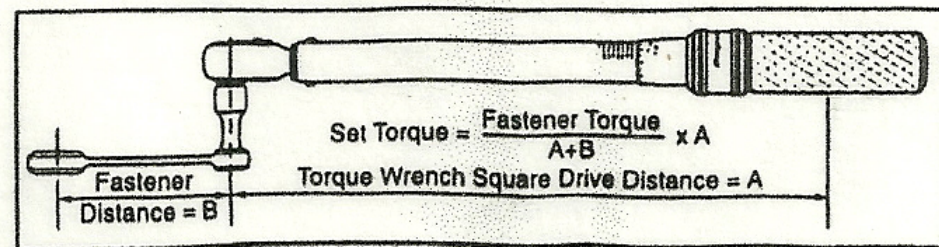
Fastener torque is less than torque wrench square drive torque.
